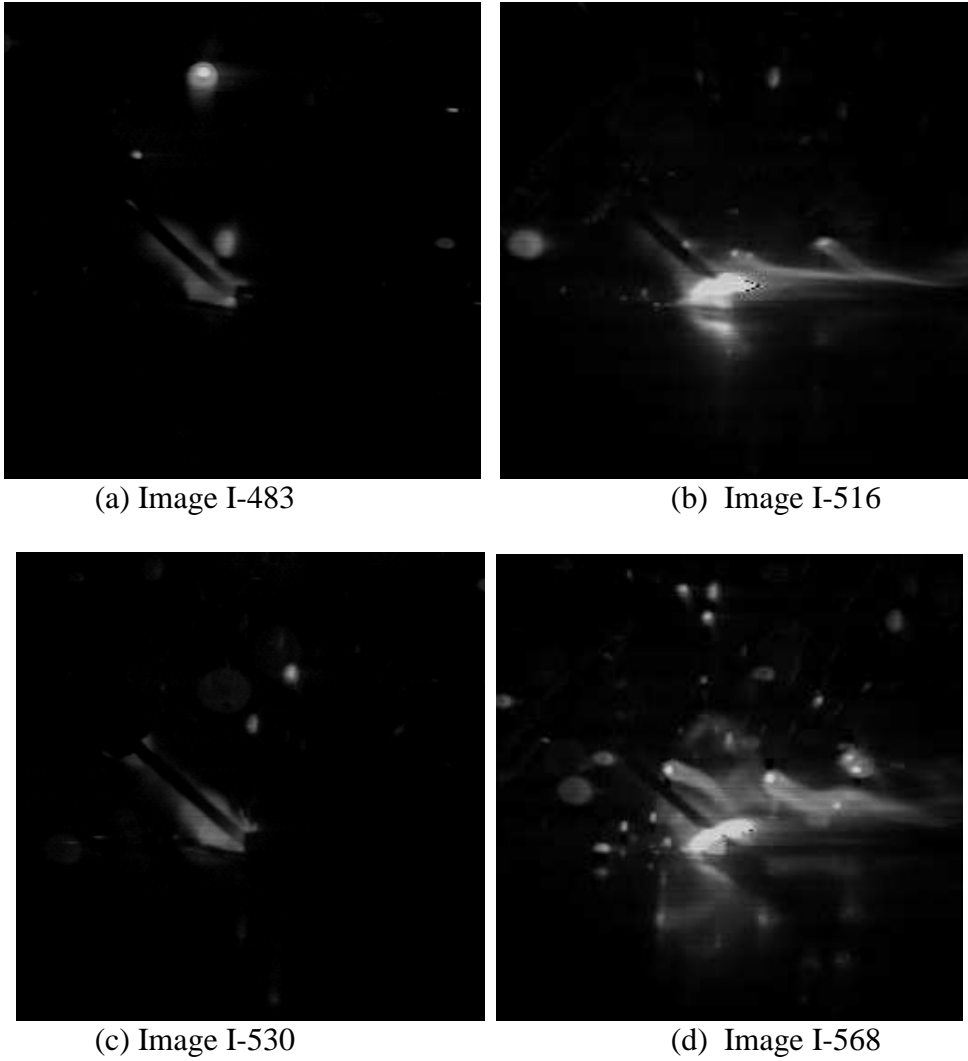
HSV Showing Short Circuiting of the Wire to the Weld Pool and Arc Re-Ignition in Lap Fillet Specimen 083005-b
